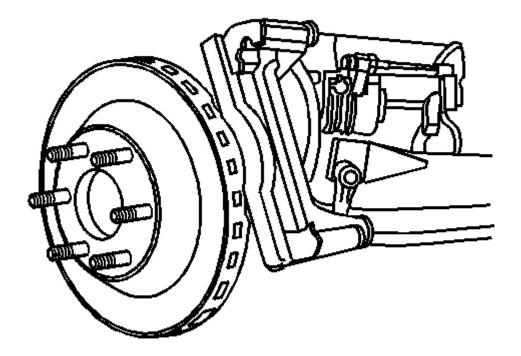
View Of Brake Caliper Guide Pin Courtesy of GENERAL MOTORS CORP.
